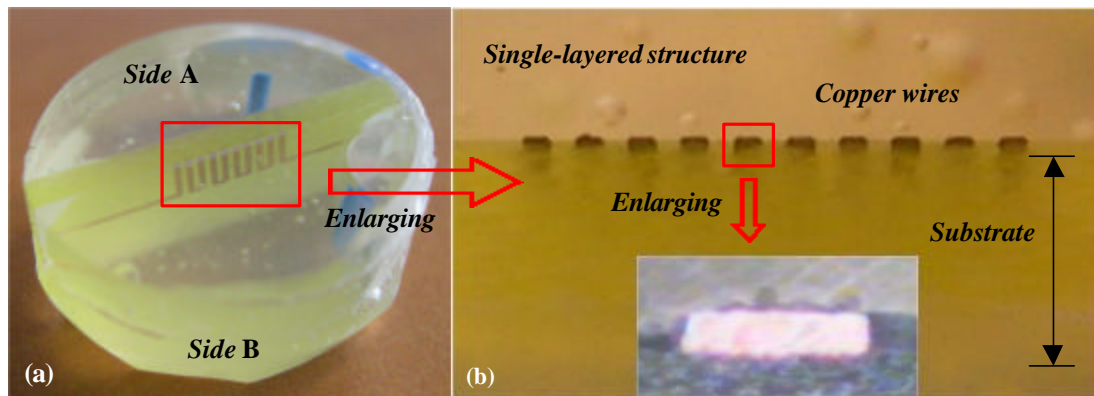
(a) Sample of part copper wires fixed by using the acrylic resin. (b) Enlarged images of the thickness of part copper wires fabricated on the PCB sample.
